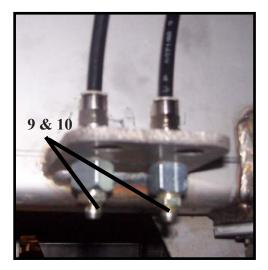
Jack Assembly Gears & Tubes (MULTAPPLIER Ready)
